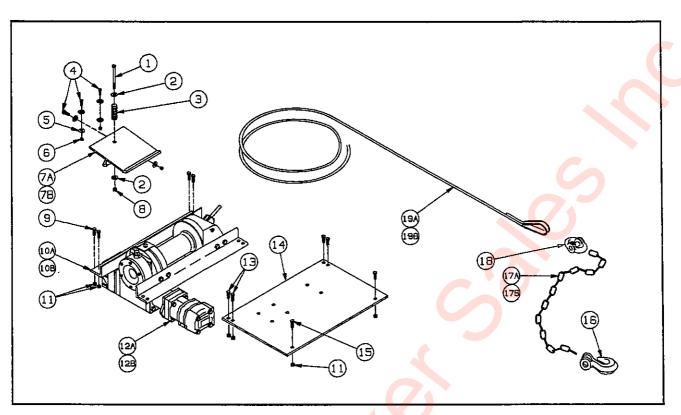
Winch Assembly 12,000 and 20,000 Lb.
